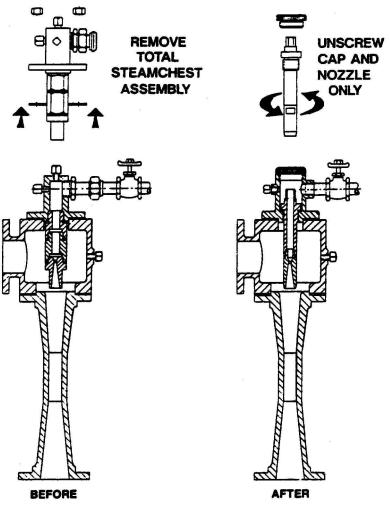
Retrofit quick-inspection steam nozzle assembly. ("Quickcheck Steamchest"(TM), Courtesy Unique Systems, Inc.)
